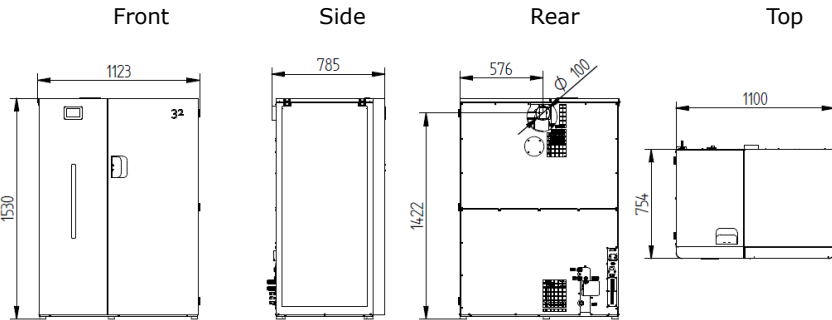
C - Dimensions of the SZM A PLUS 16 kW boiler (NS≥01-25-00082)
